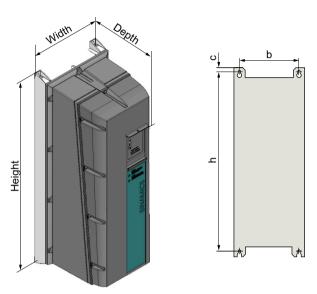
Dimension drawing, PM230 Power Module IP55, FSA ... FSC
